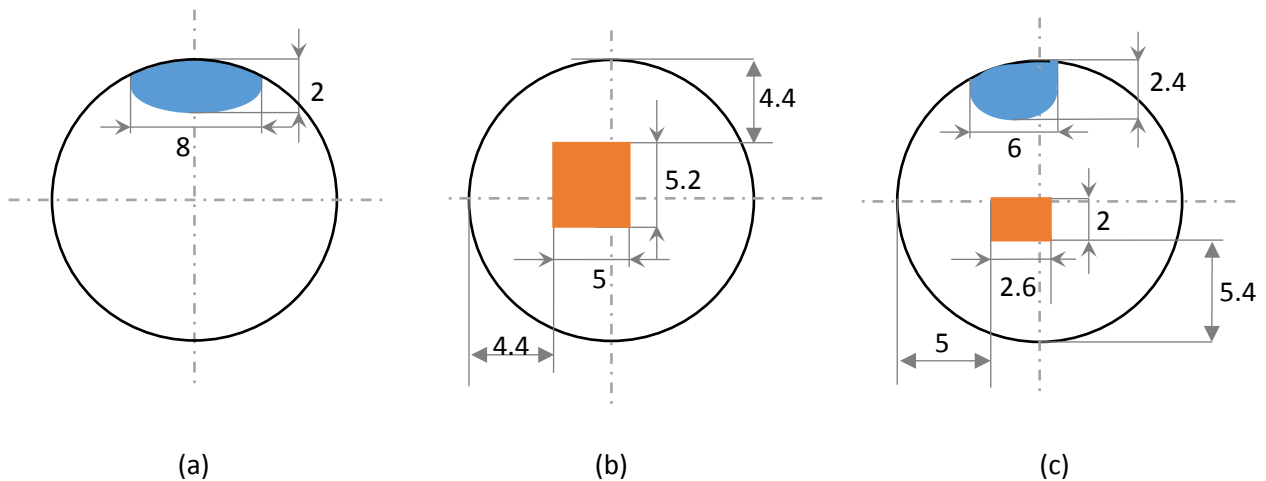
Location and geometry of the artificial defects: a) surface defect; b) internal defect; c) surface and internal defects.
